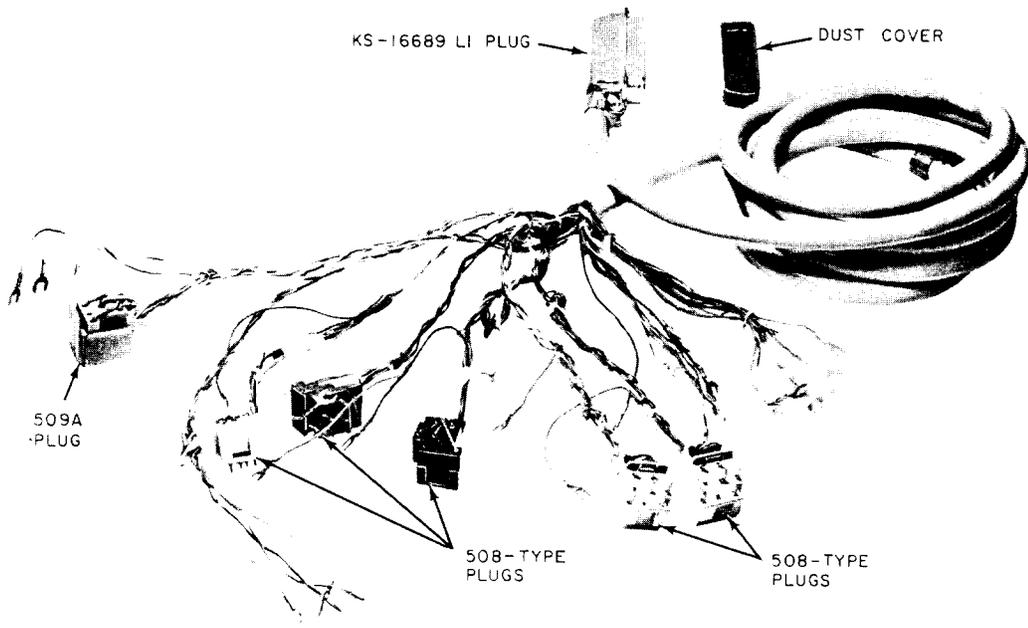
Mounting Cord Equipped With 508- and 509A-Type Plugs
